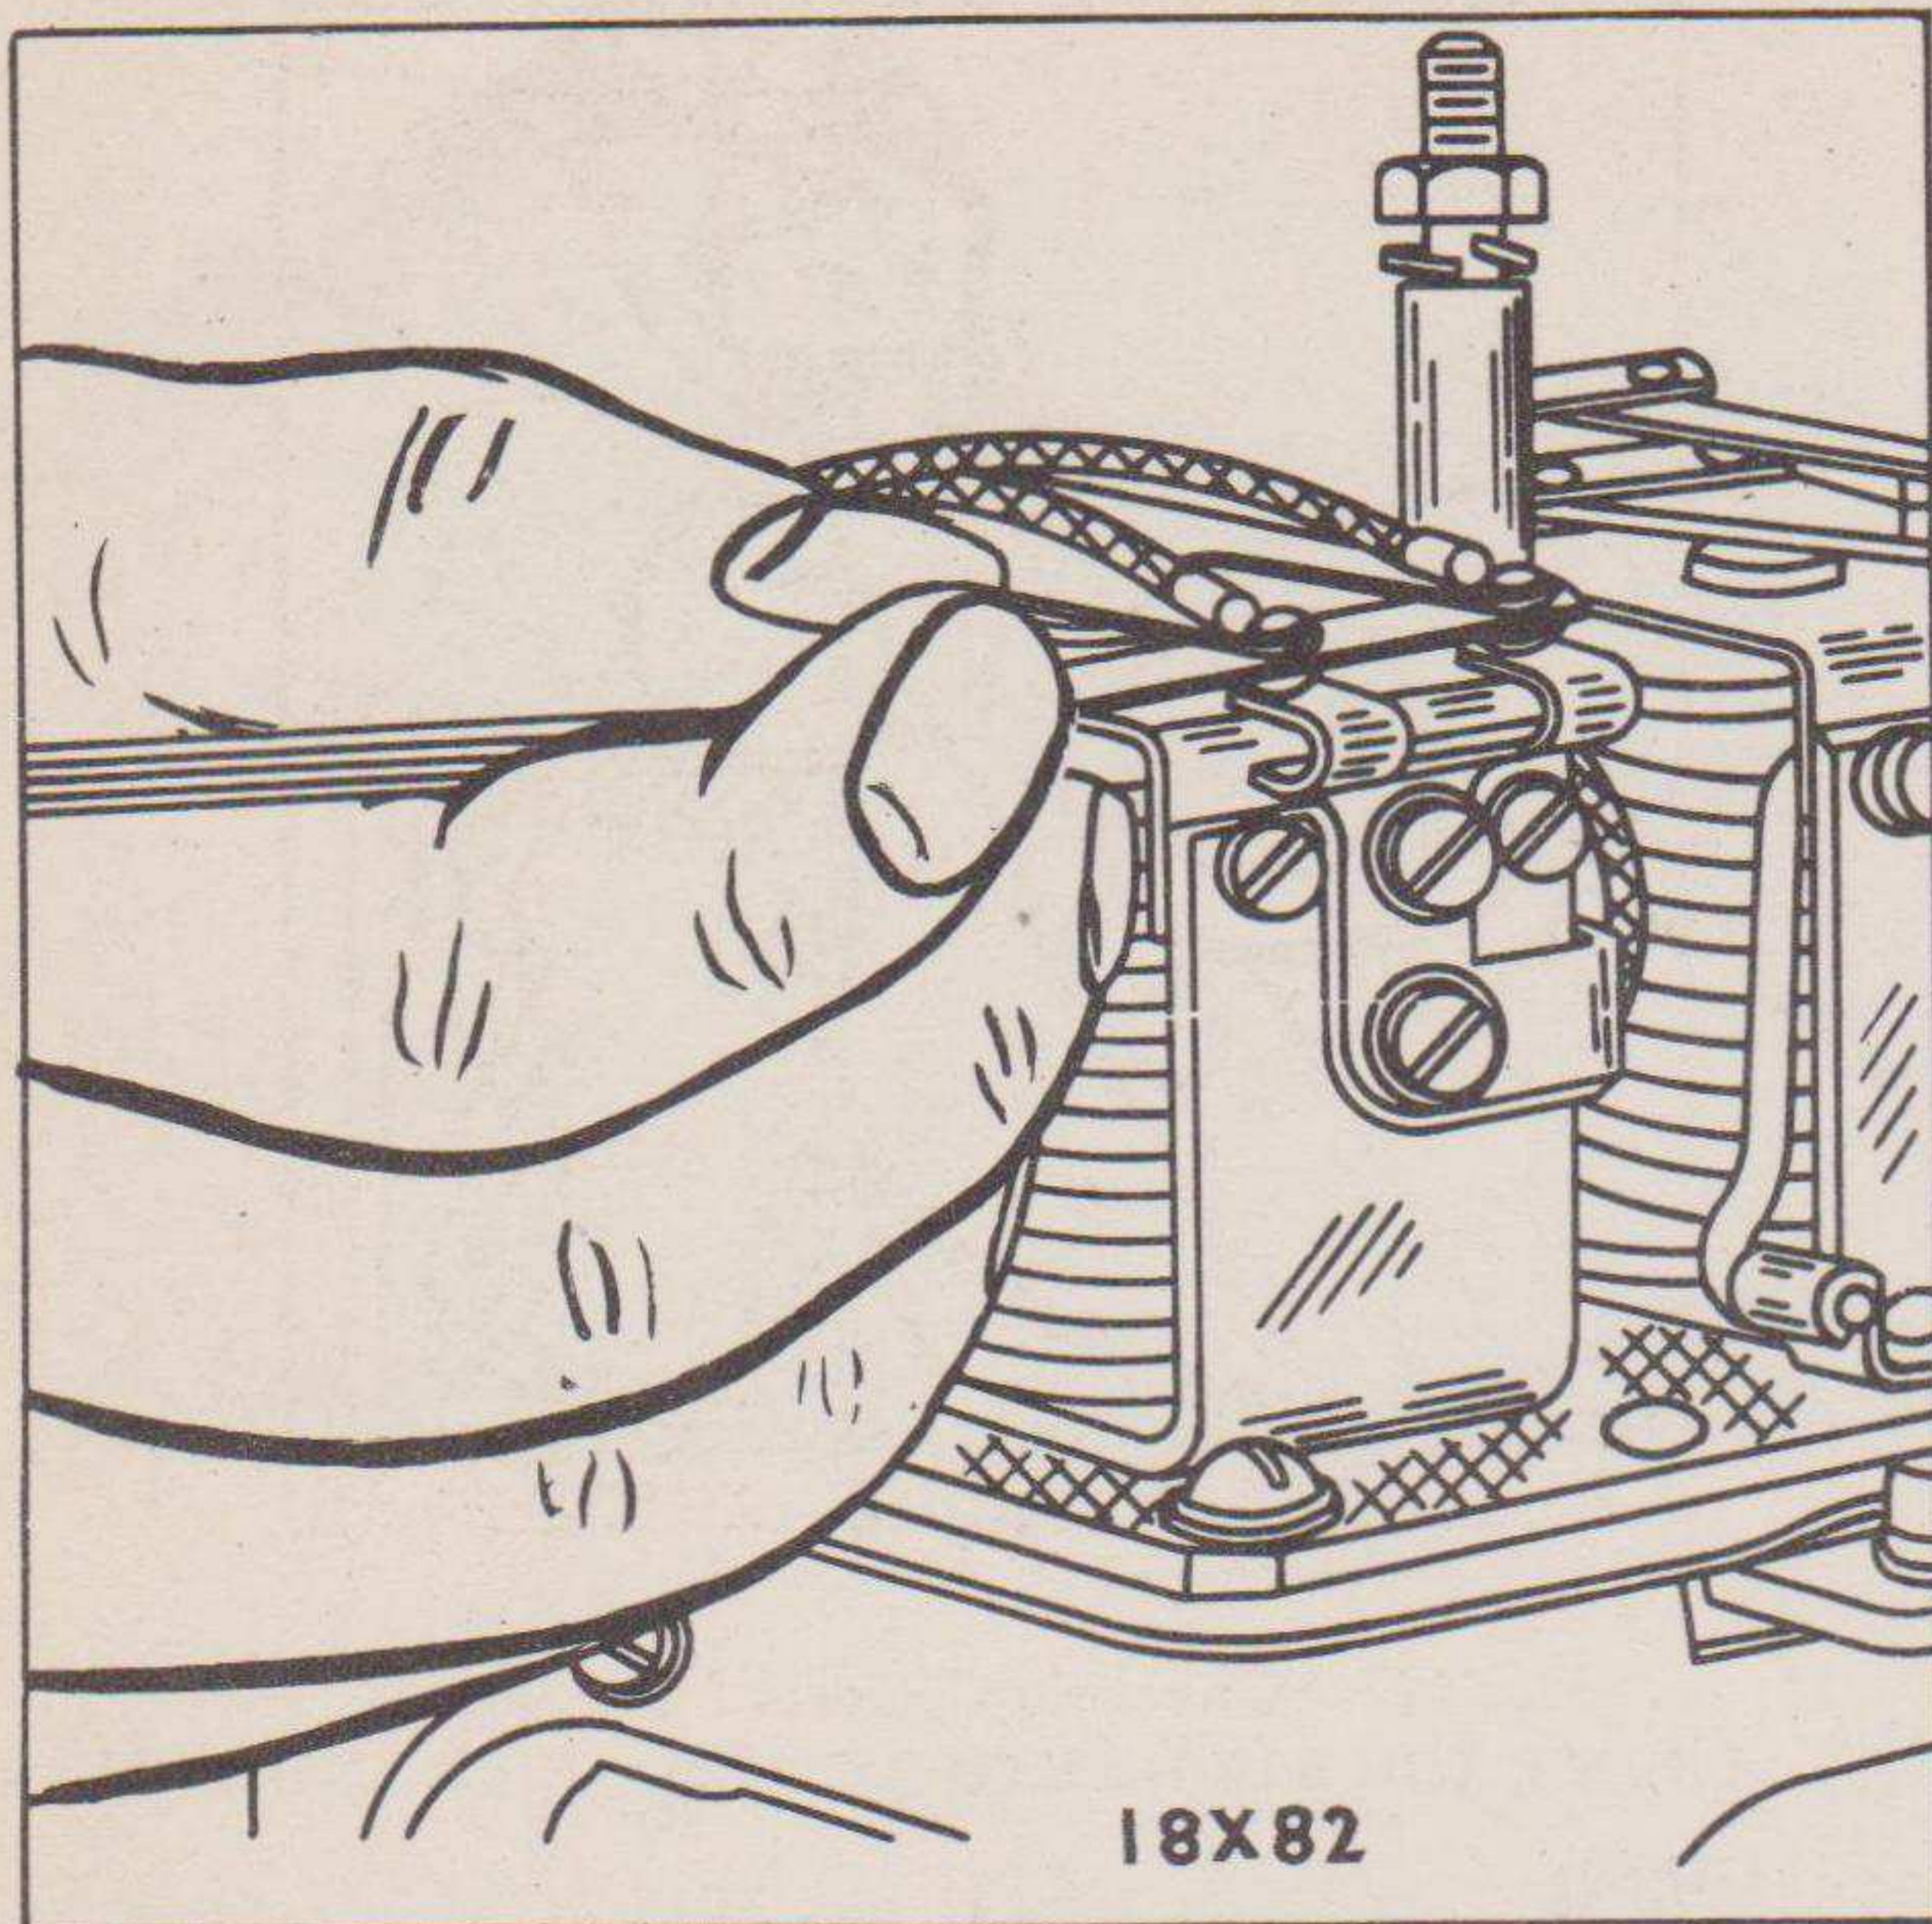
Checking Gap of Circuit Breaker Contact Points
